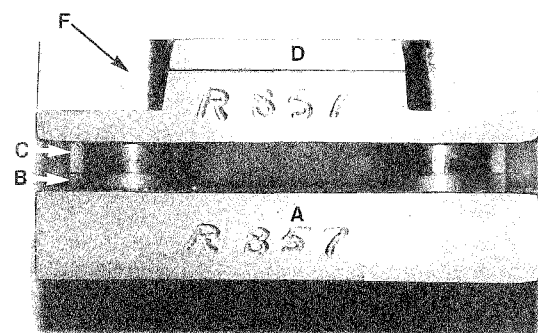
Die and gauge block assembled: A — base of die; B — ferrule, base of taper cylinder; C — ferrule of gauge block; D — base of gauge block; F — measuring window (area where measurements of accuracy are made).
